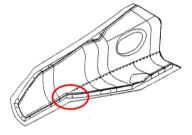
Example for ABDR in composite structure (fullscale component test of MLG-Door)
